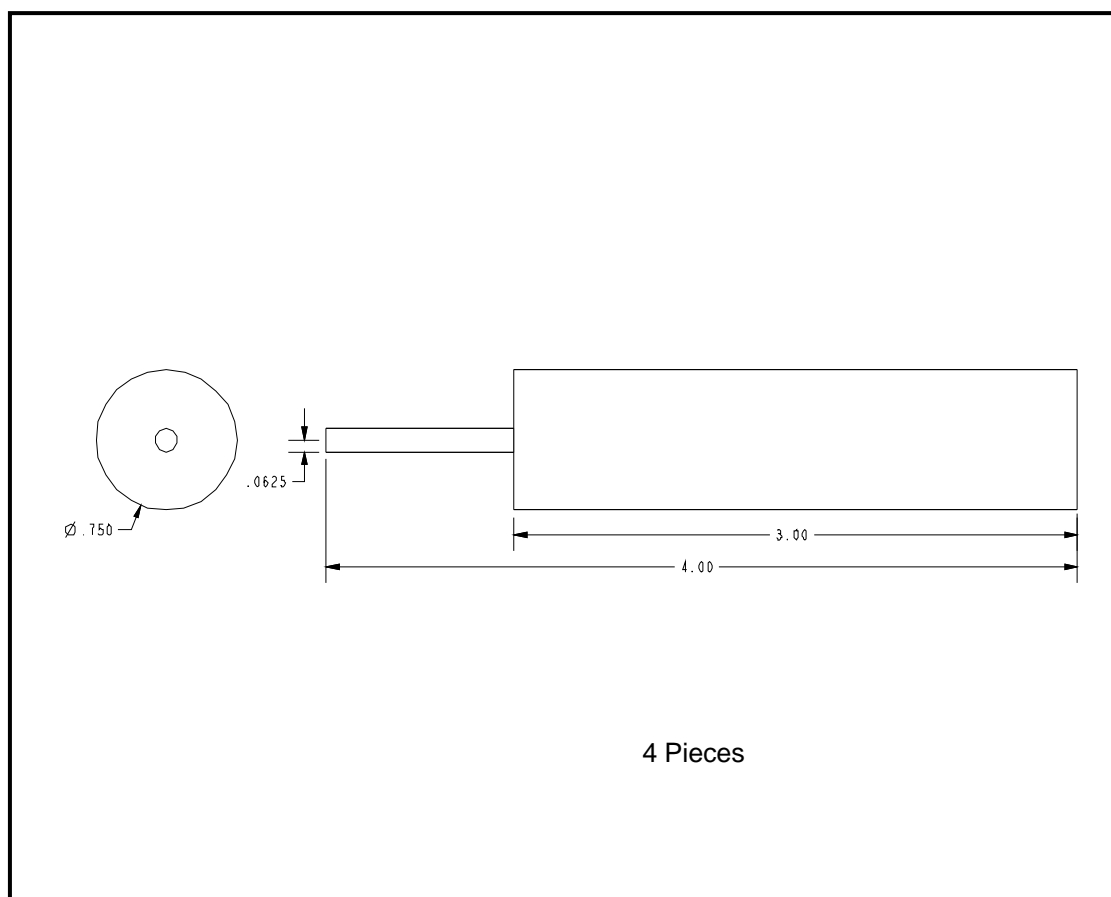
CAD Drawing of the Standard JSR Mold – Sampling Hole Rods
